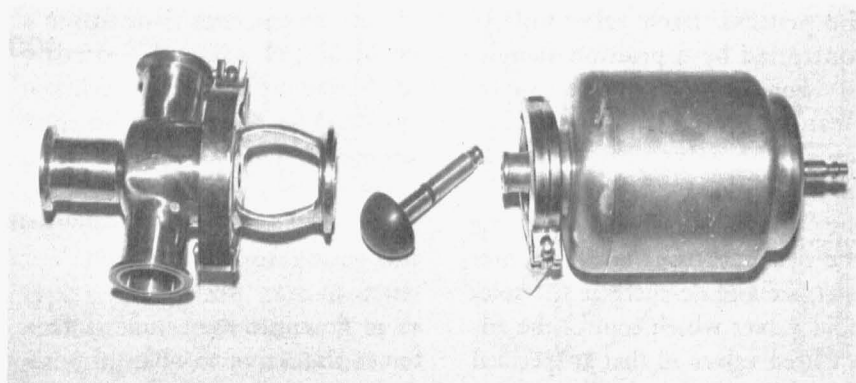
Basic Parts of an Air-Actuated Sanitary Valve: *valve body, valve stem, and air actuator.
